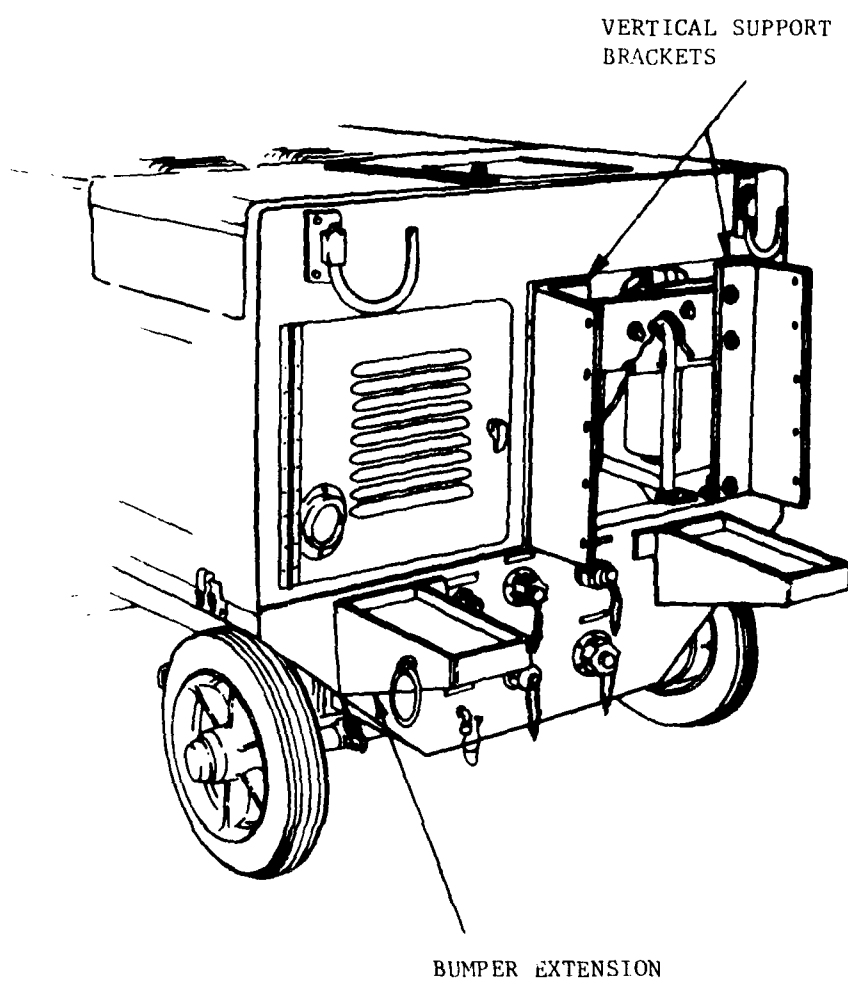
Mounting Arrangement for Monitor on AHT-64 Test Stand
